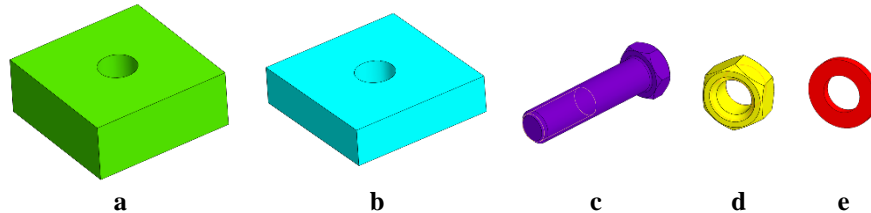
Models of parts included in the bolted joint: a – upper plate; b – lower plate; c – M12 bolt; d – M12 nut; e – washer.
